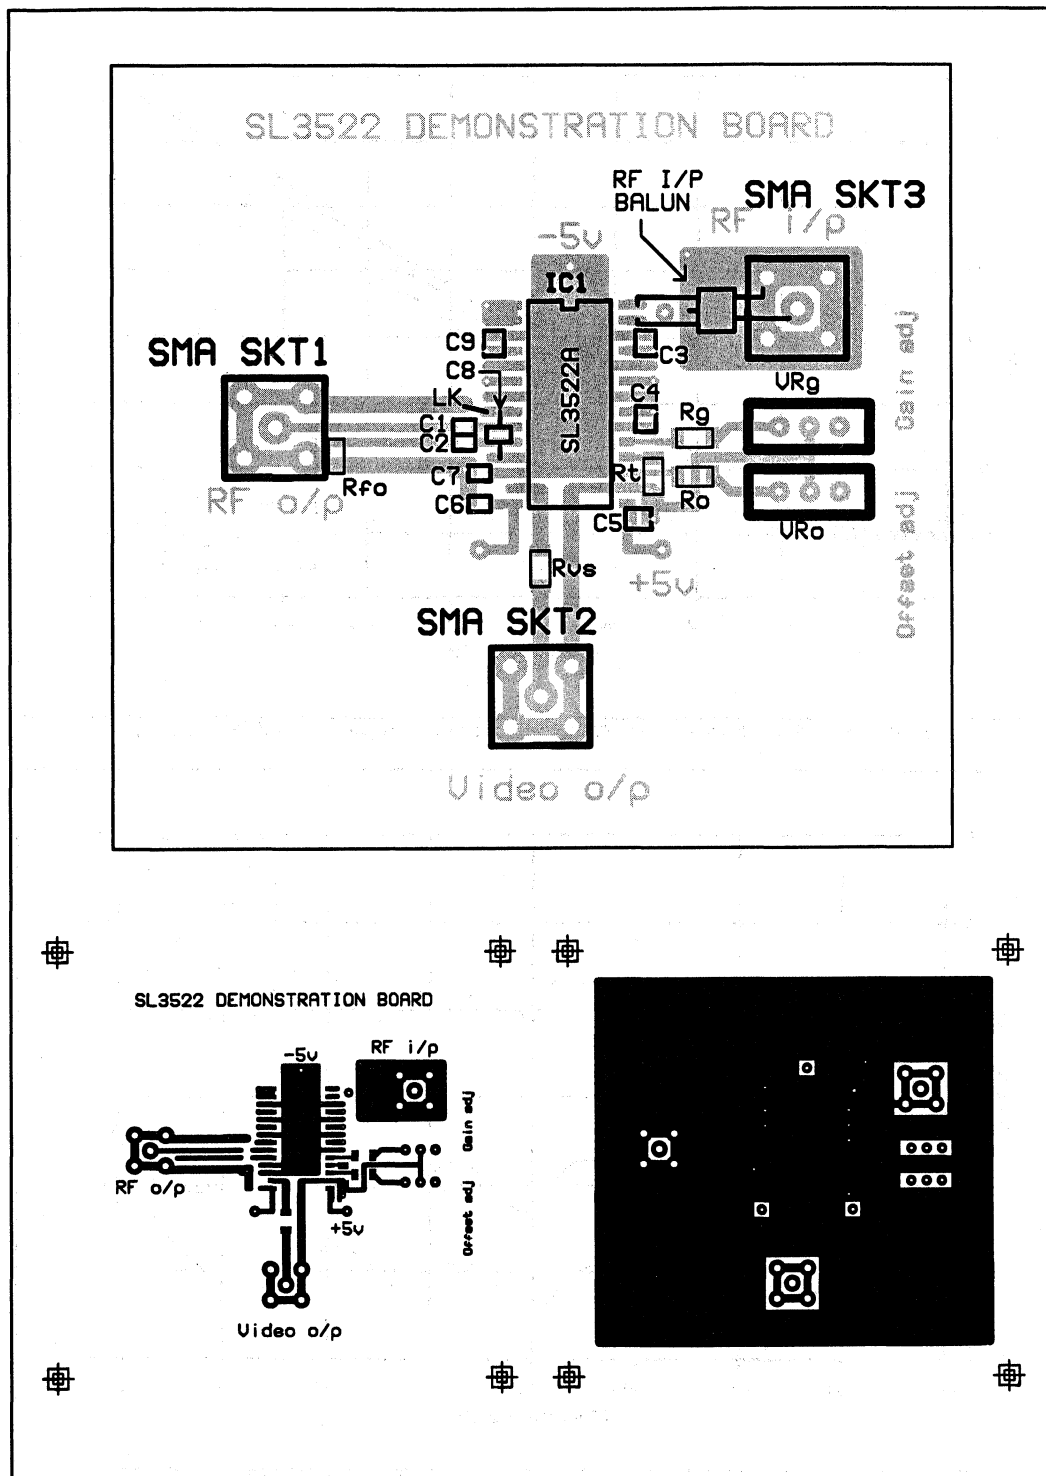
Demonstration Circuit PCB showing component positions (2x full size) with top and bottom copper masks (full size)
